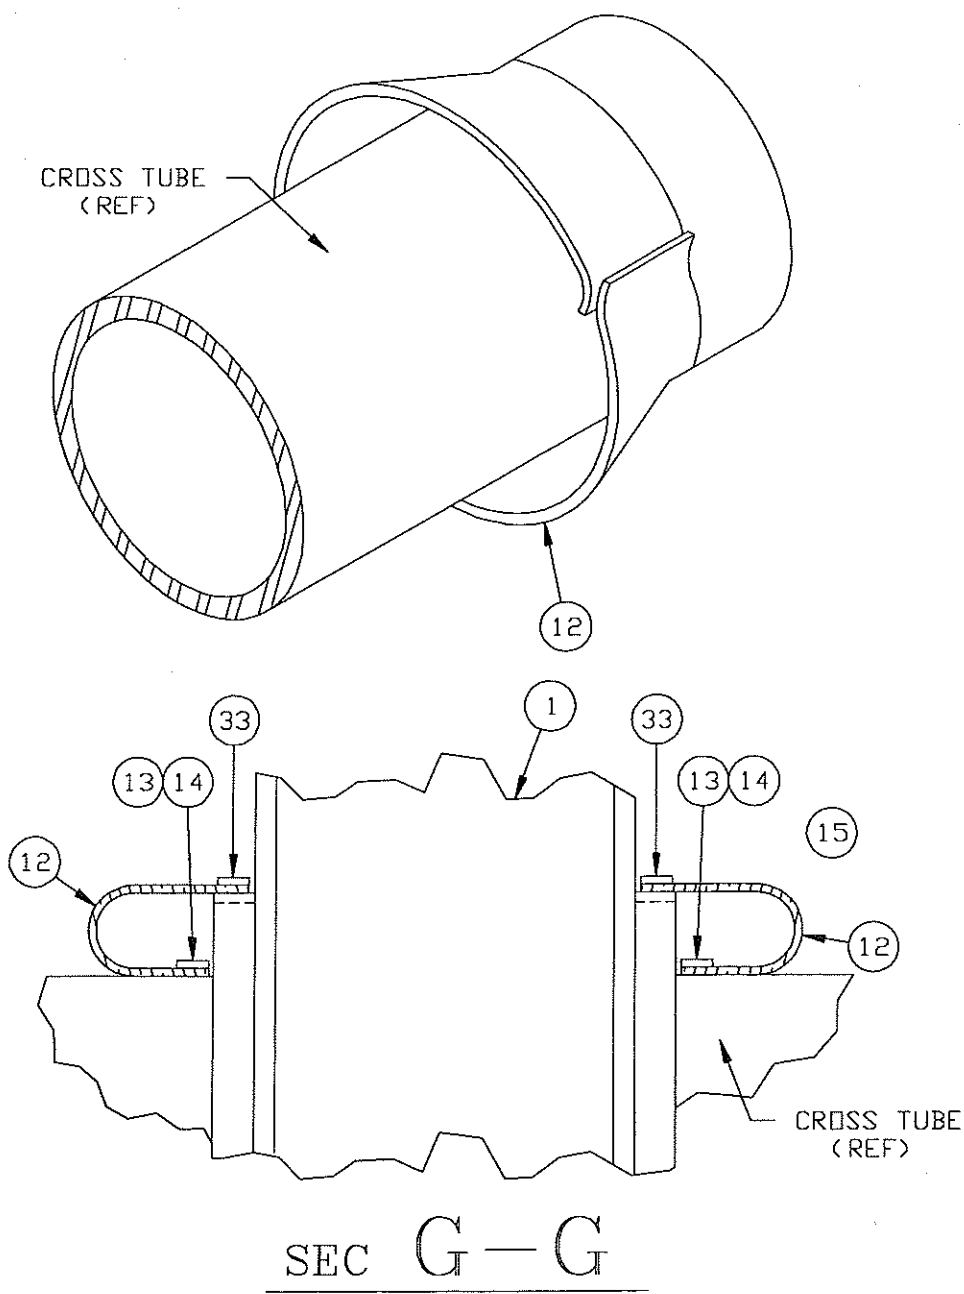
AXLEBOX ASSEMBLY (A85221, SHEET 3 OF 4)
